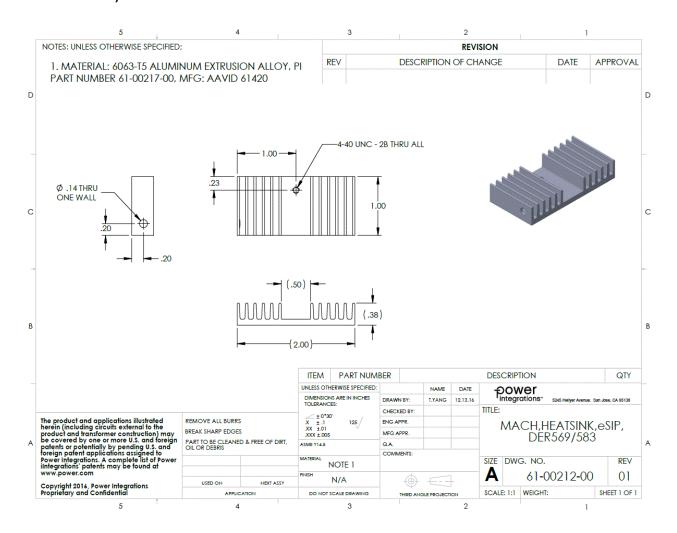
Primary Heat Sink Sheet Metal Drawing.
